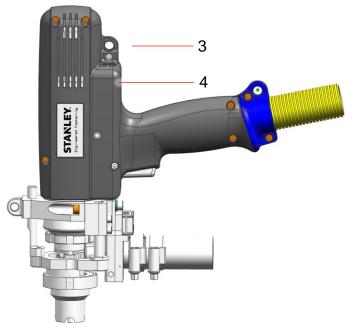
Hook the stud weld gun onto the spring balancer
